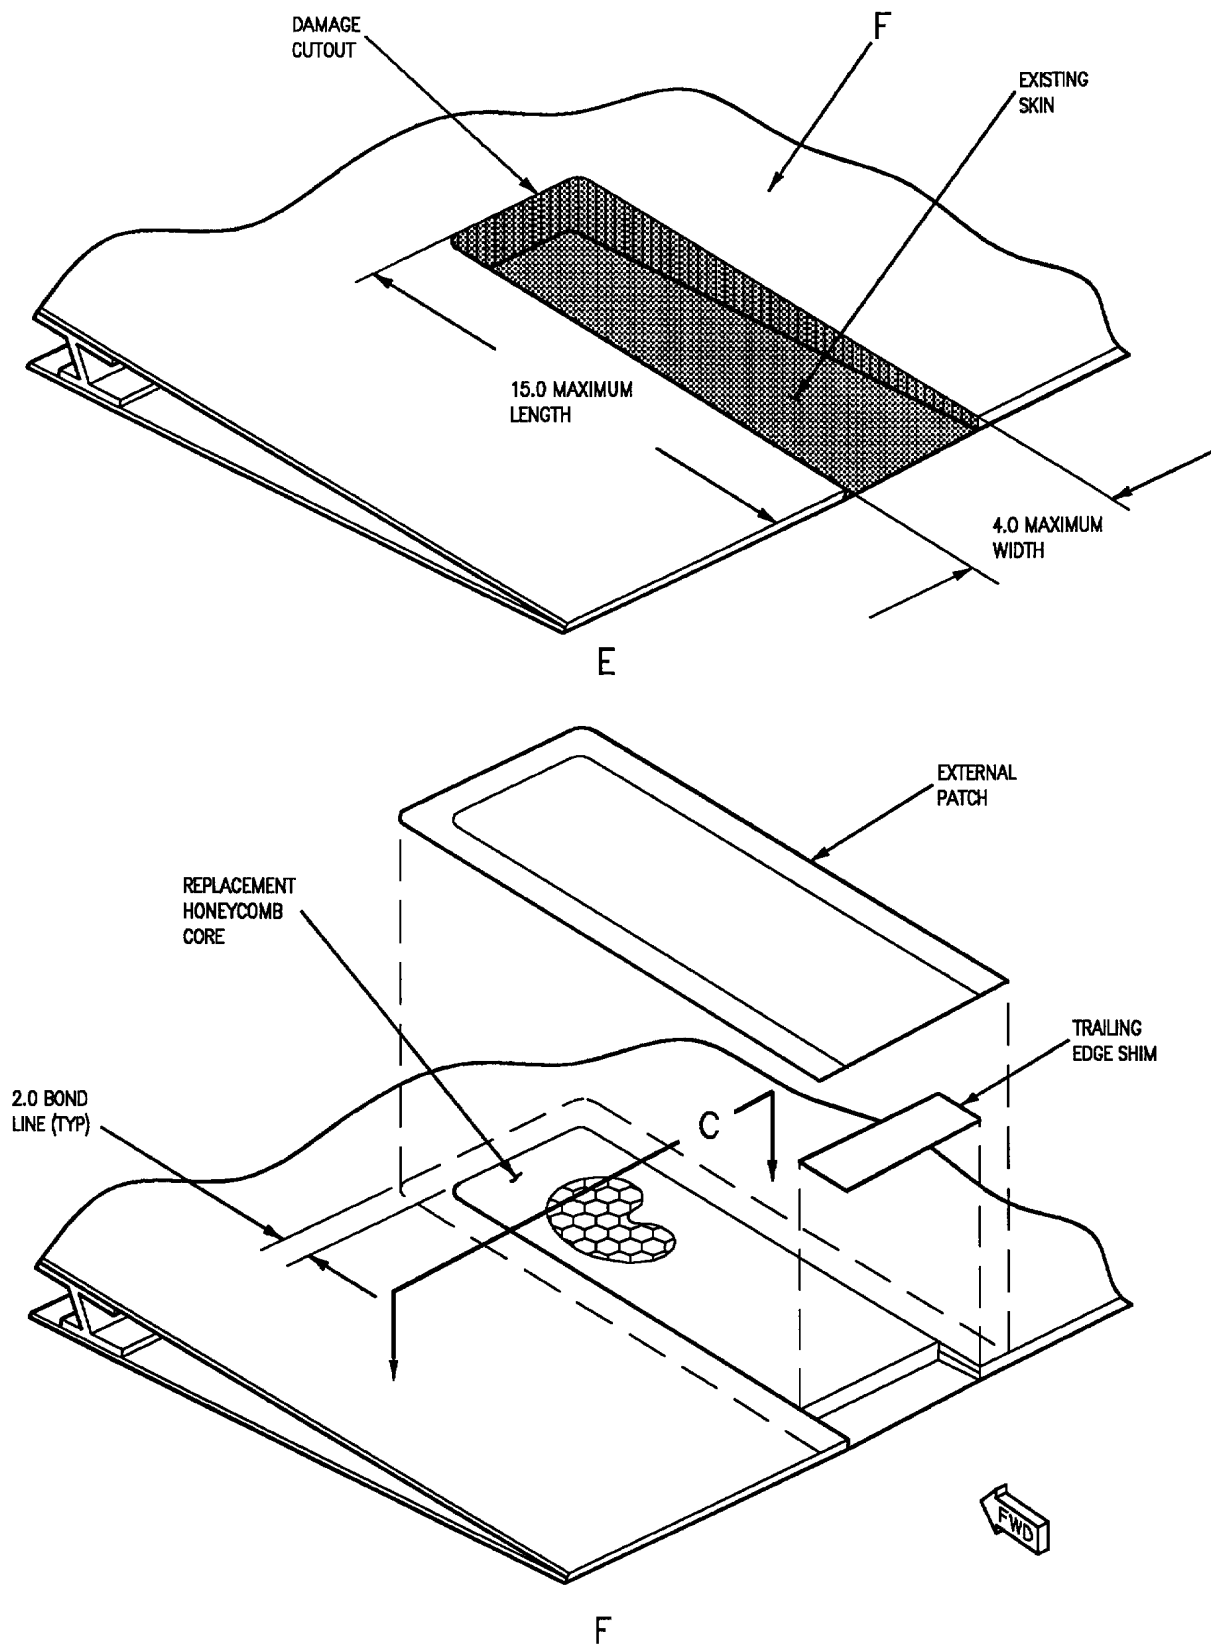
Outboard Trailing Edge Damage Repair (Sheet 4)
